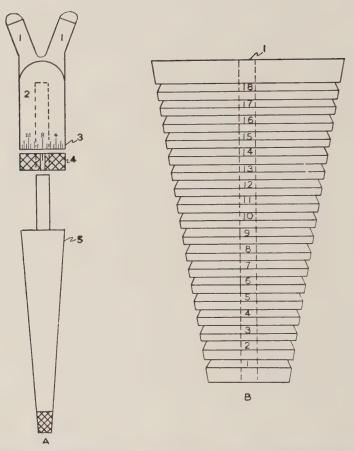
The Willems Faceting Device. A, faceting device disassembled; 1, fishtail blades; 2, handpiece; 3, index scale; 4, correction ring; 5, adapter. B, jamb peg; 1, center hole.
